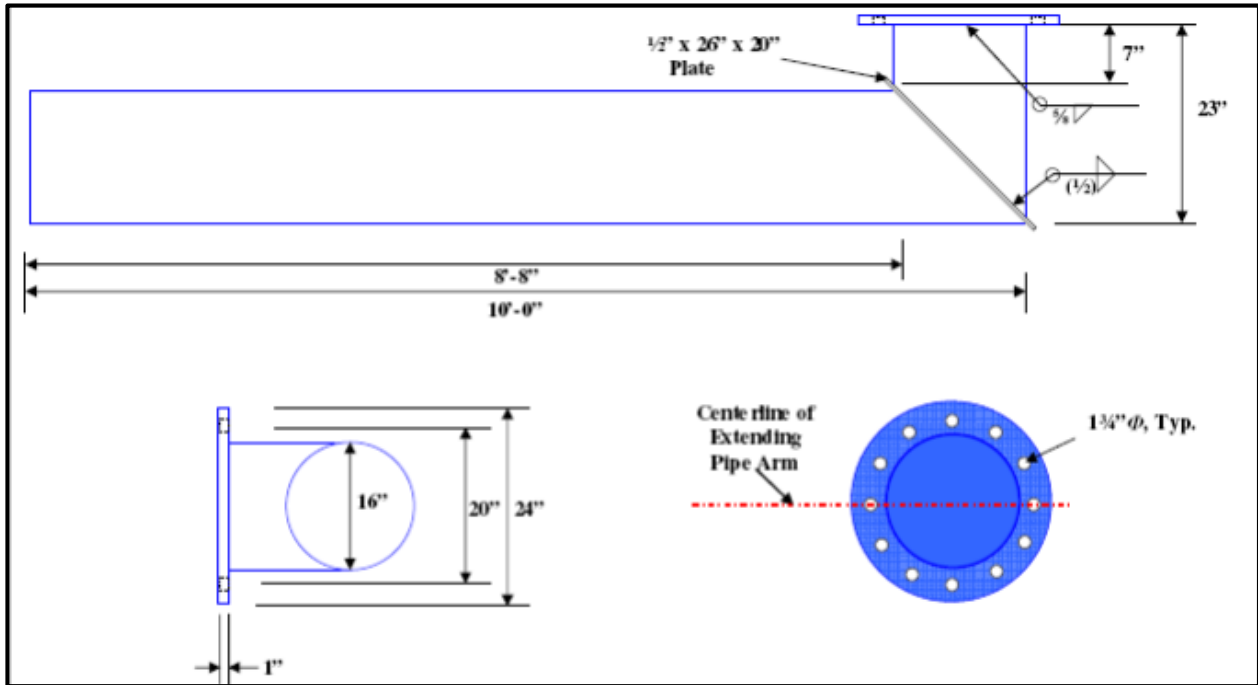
Schematic of full-scale loading apparatus (from Cook and Halcovage 2007)
